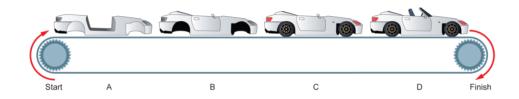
A conveyor belt moves the car past assembly stations. At each station parts are added to the car.
